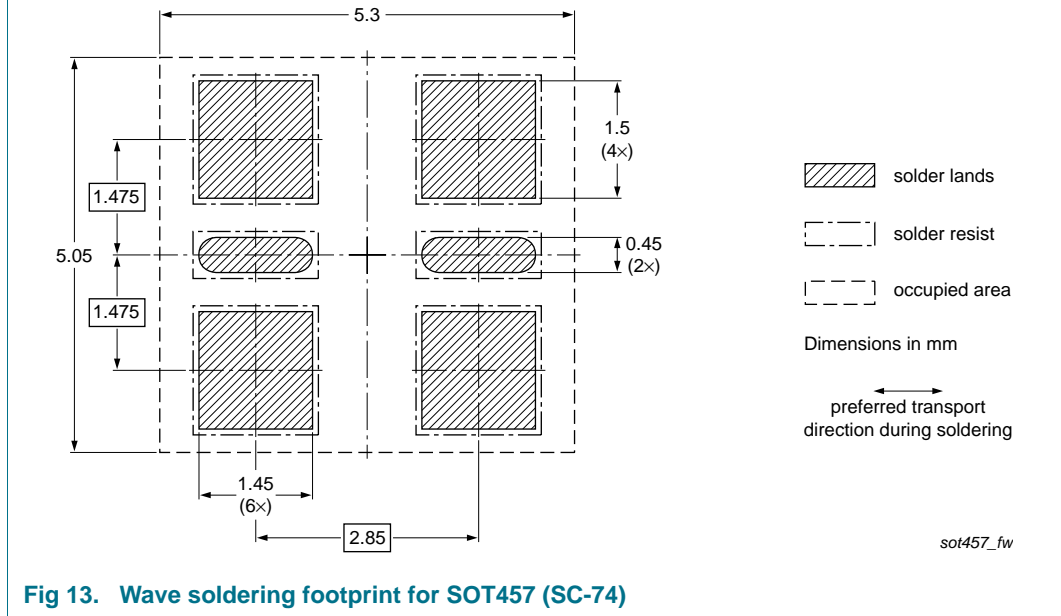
Wave soldering footprint for SOT457 (SC-74)
